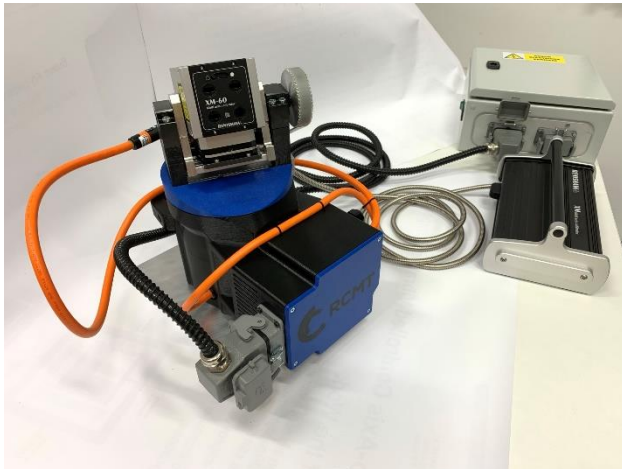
Prototype of the launch unit to be placed in the machine tool working space.
